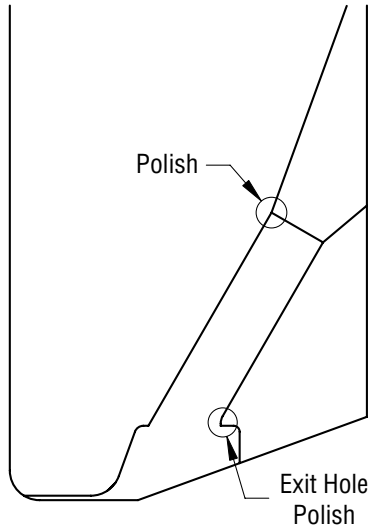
Hole polish and exit hole relief of 60° wire feed angle wedge
